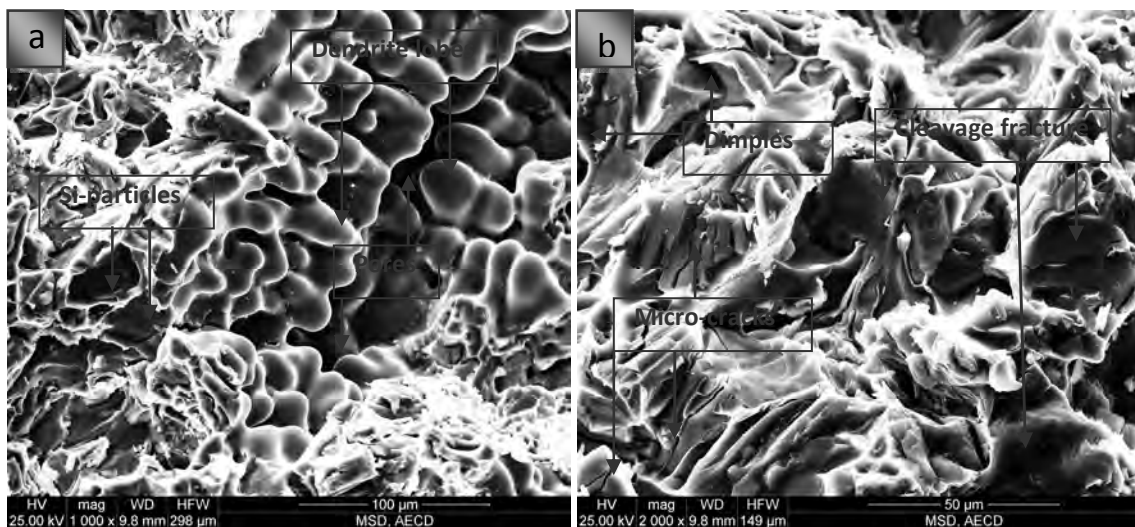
Fracture surface morphology of the peakaged Alloy-6 after impact test
